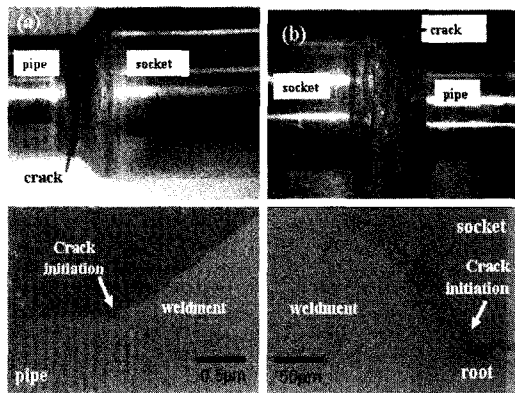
Micrographs showing the fracture of socket welded small bore pipe; (a),(b) fracture position and (c),(d) crack initiation site
